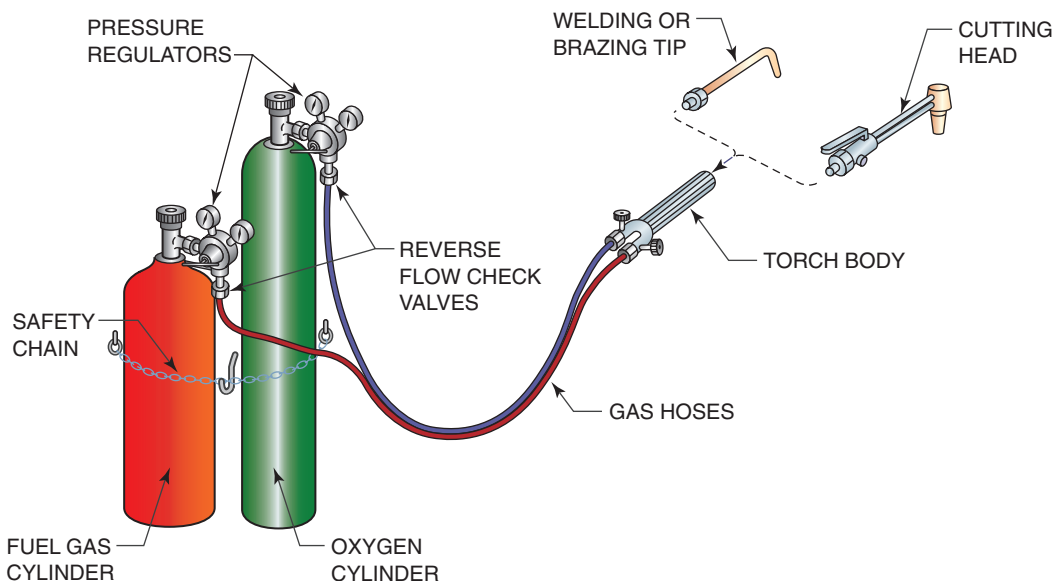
Oxyfuel welding and cutting equipment.
